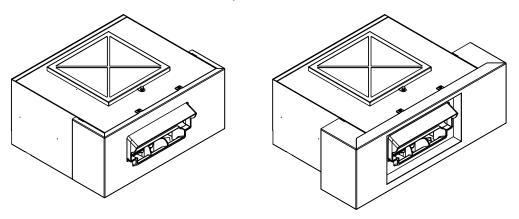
Blower packs with small skirt (left) and large skirt (right)
